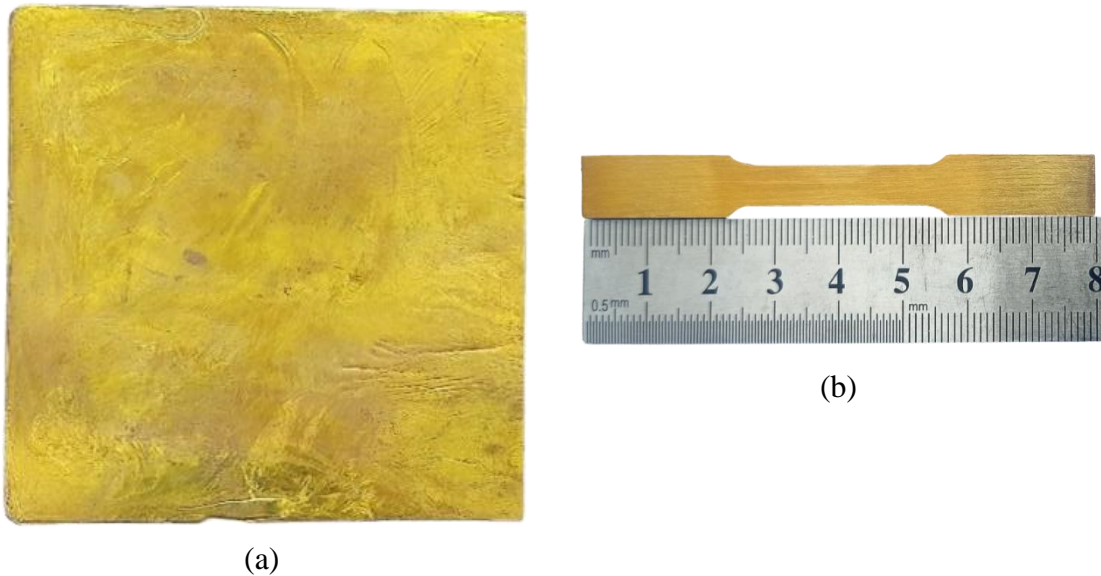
Photographs of (a) Alloy plate and (b) Tensile specimen.
